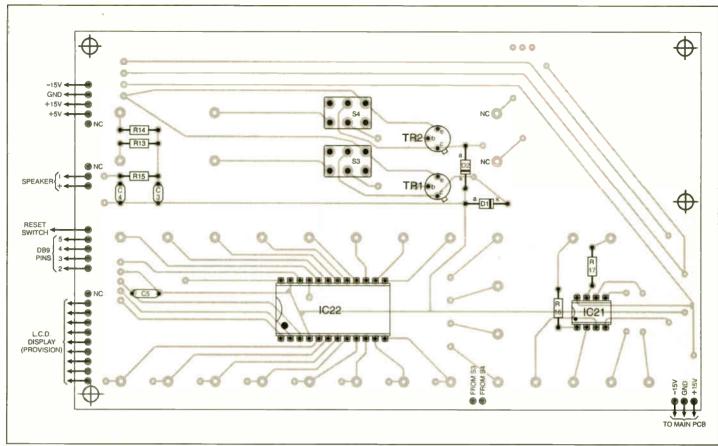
Component layout details for the ATOM microcontroller p.c.b.
